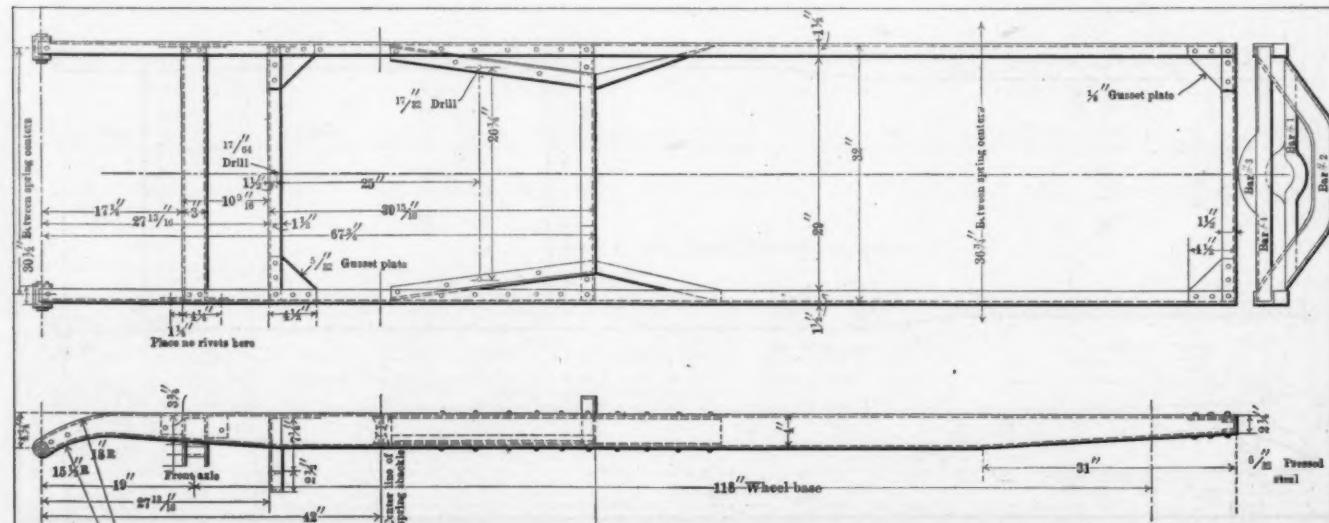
Inter-State frame in plan and elevation, with four cross members, and side bars straight in front and rear
